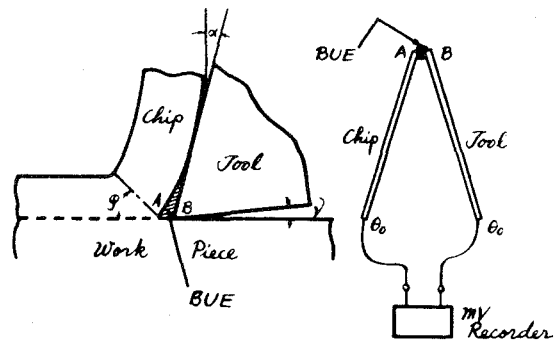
Method for BUE in Tool-Work Thermocouple.
